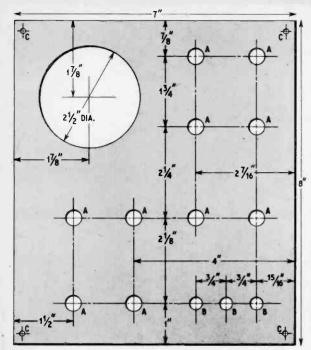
Drilling details of the front panel made from 16 s.w.g. aluminium sheet. Holes 'A'—\{\}in dia; holes 'B'—\{\}in dia; holes 'C'—No. 26 drill
